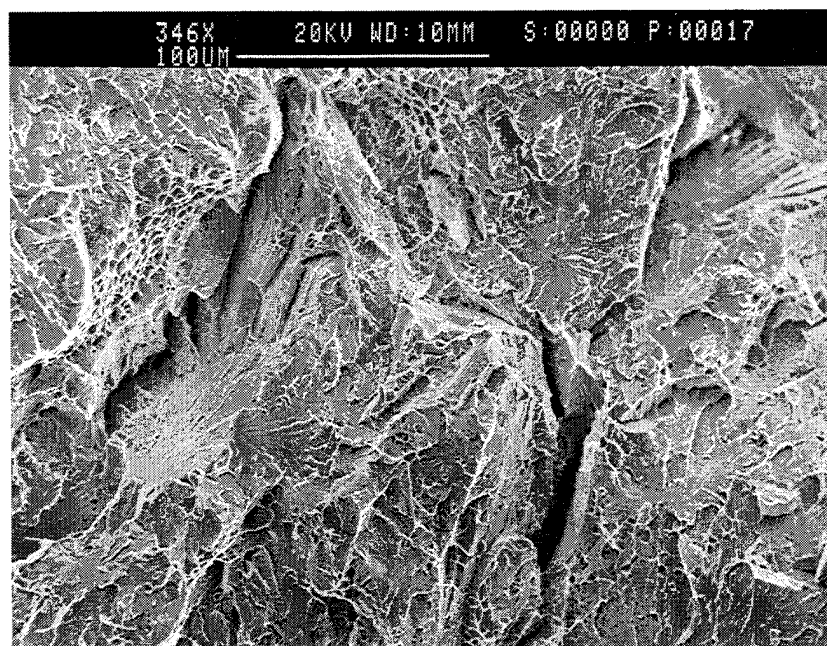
MV4 - GMA Weld Using C5 Cover Gas Showing Extensive Intergranular Cracking
